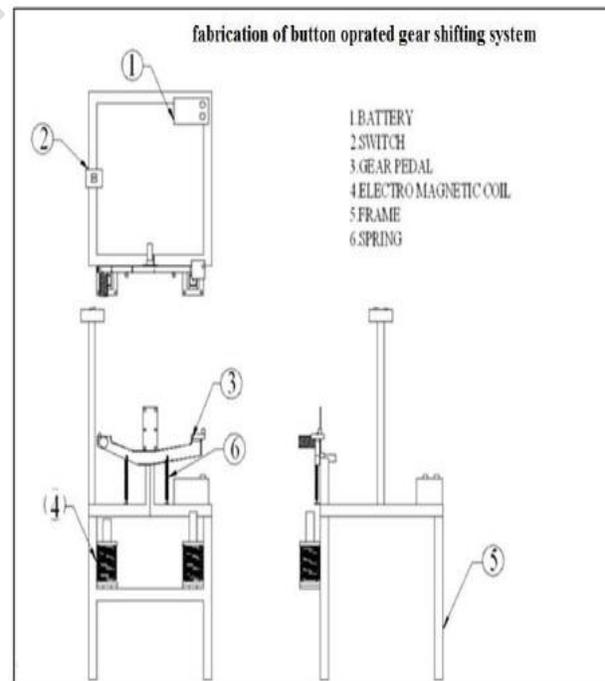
2d Drawing fabrication of button operated gear shifting system structure
